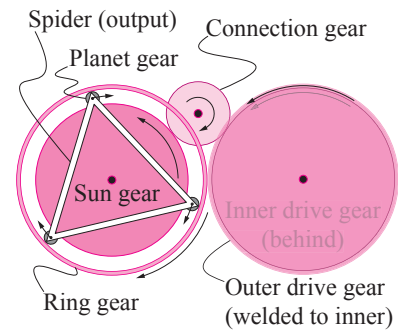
A high-gain planetary gear system, so named because the ‘planet’ gears go around the ‘sun’ gear. Often planetary gears depend on the sun or the spider or the ring not rotating. In this design, all three rotate. A CCW torque is applied to the inner drive gear which is welded to the outer drive gear (they are concentric and have nearly the same radius). The outer drive gear turns the ring gear CW. The inner drive gear turns the sun gear CCW. The three planet gears spin between the inside of the ring gear and the outside of the sun gear. As drawn, this motion would be *much* slower than the motion of the drive gears.
